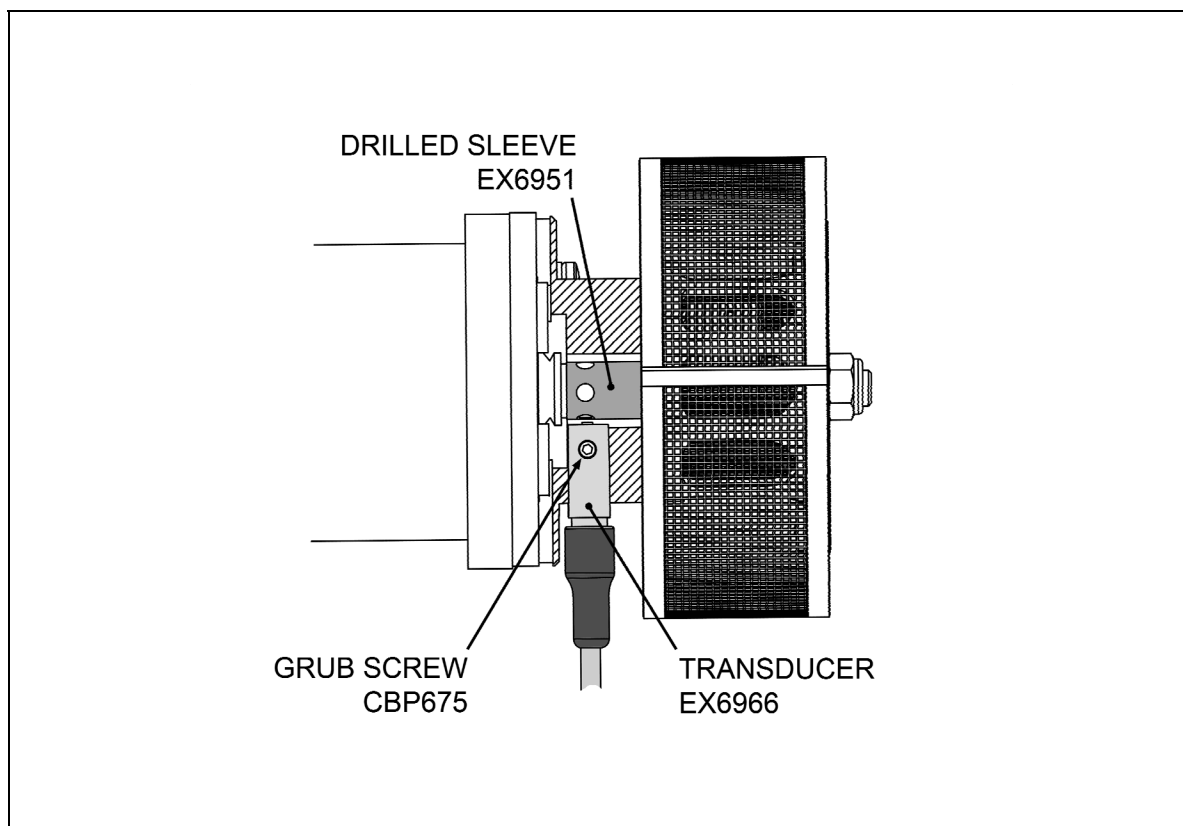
AU6539 Electric Atomiser with EX6924 Feed Body
